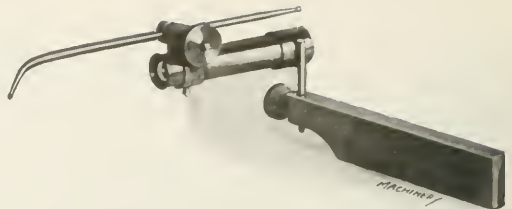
Xander Electric Test Indicator provided with Holder to mount in Toolpost
